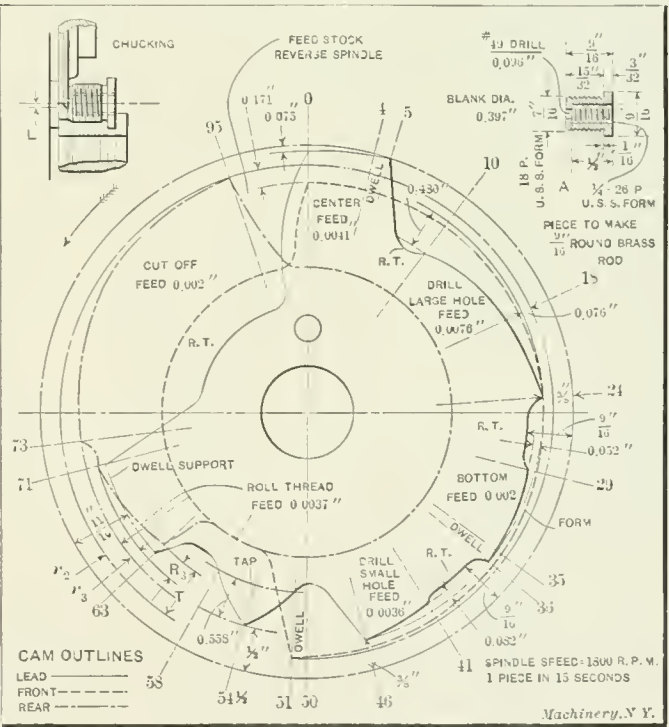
Lay-out of a Set of Cams for Performing a Thread-rolling Operation
